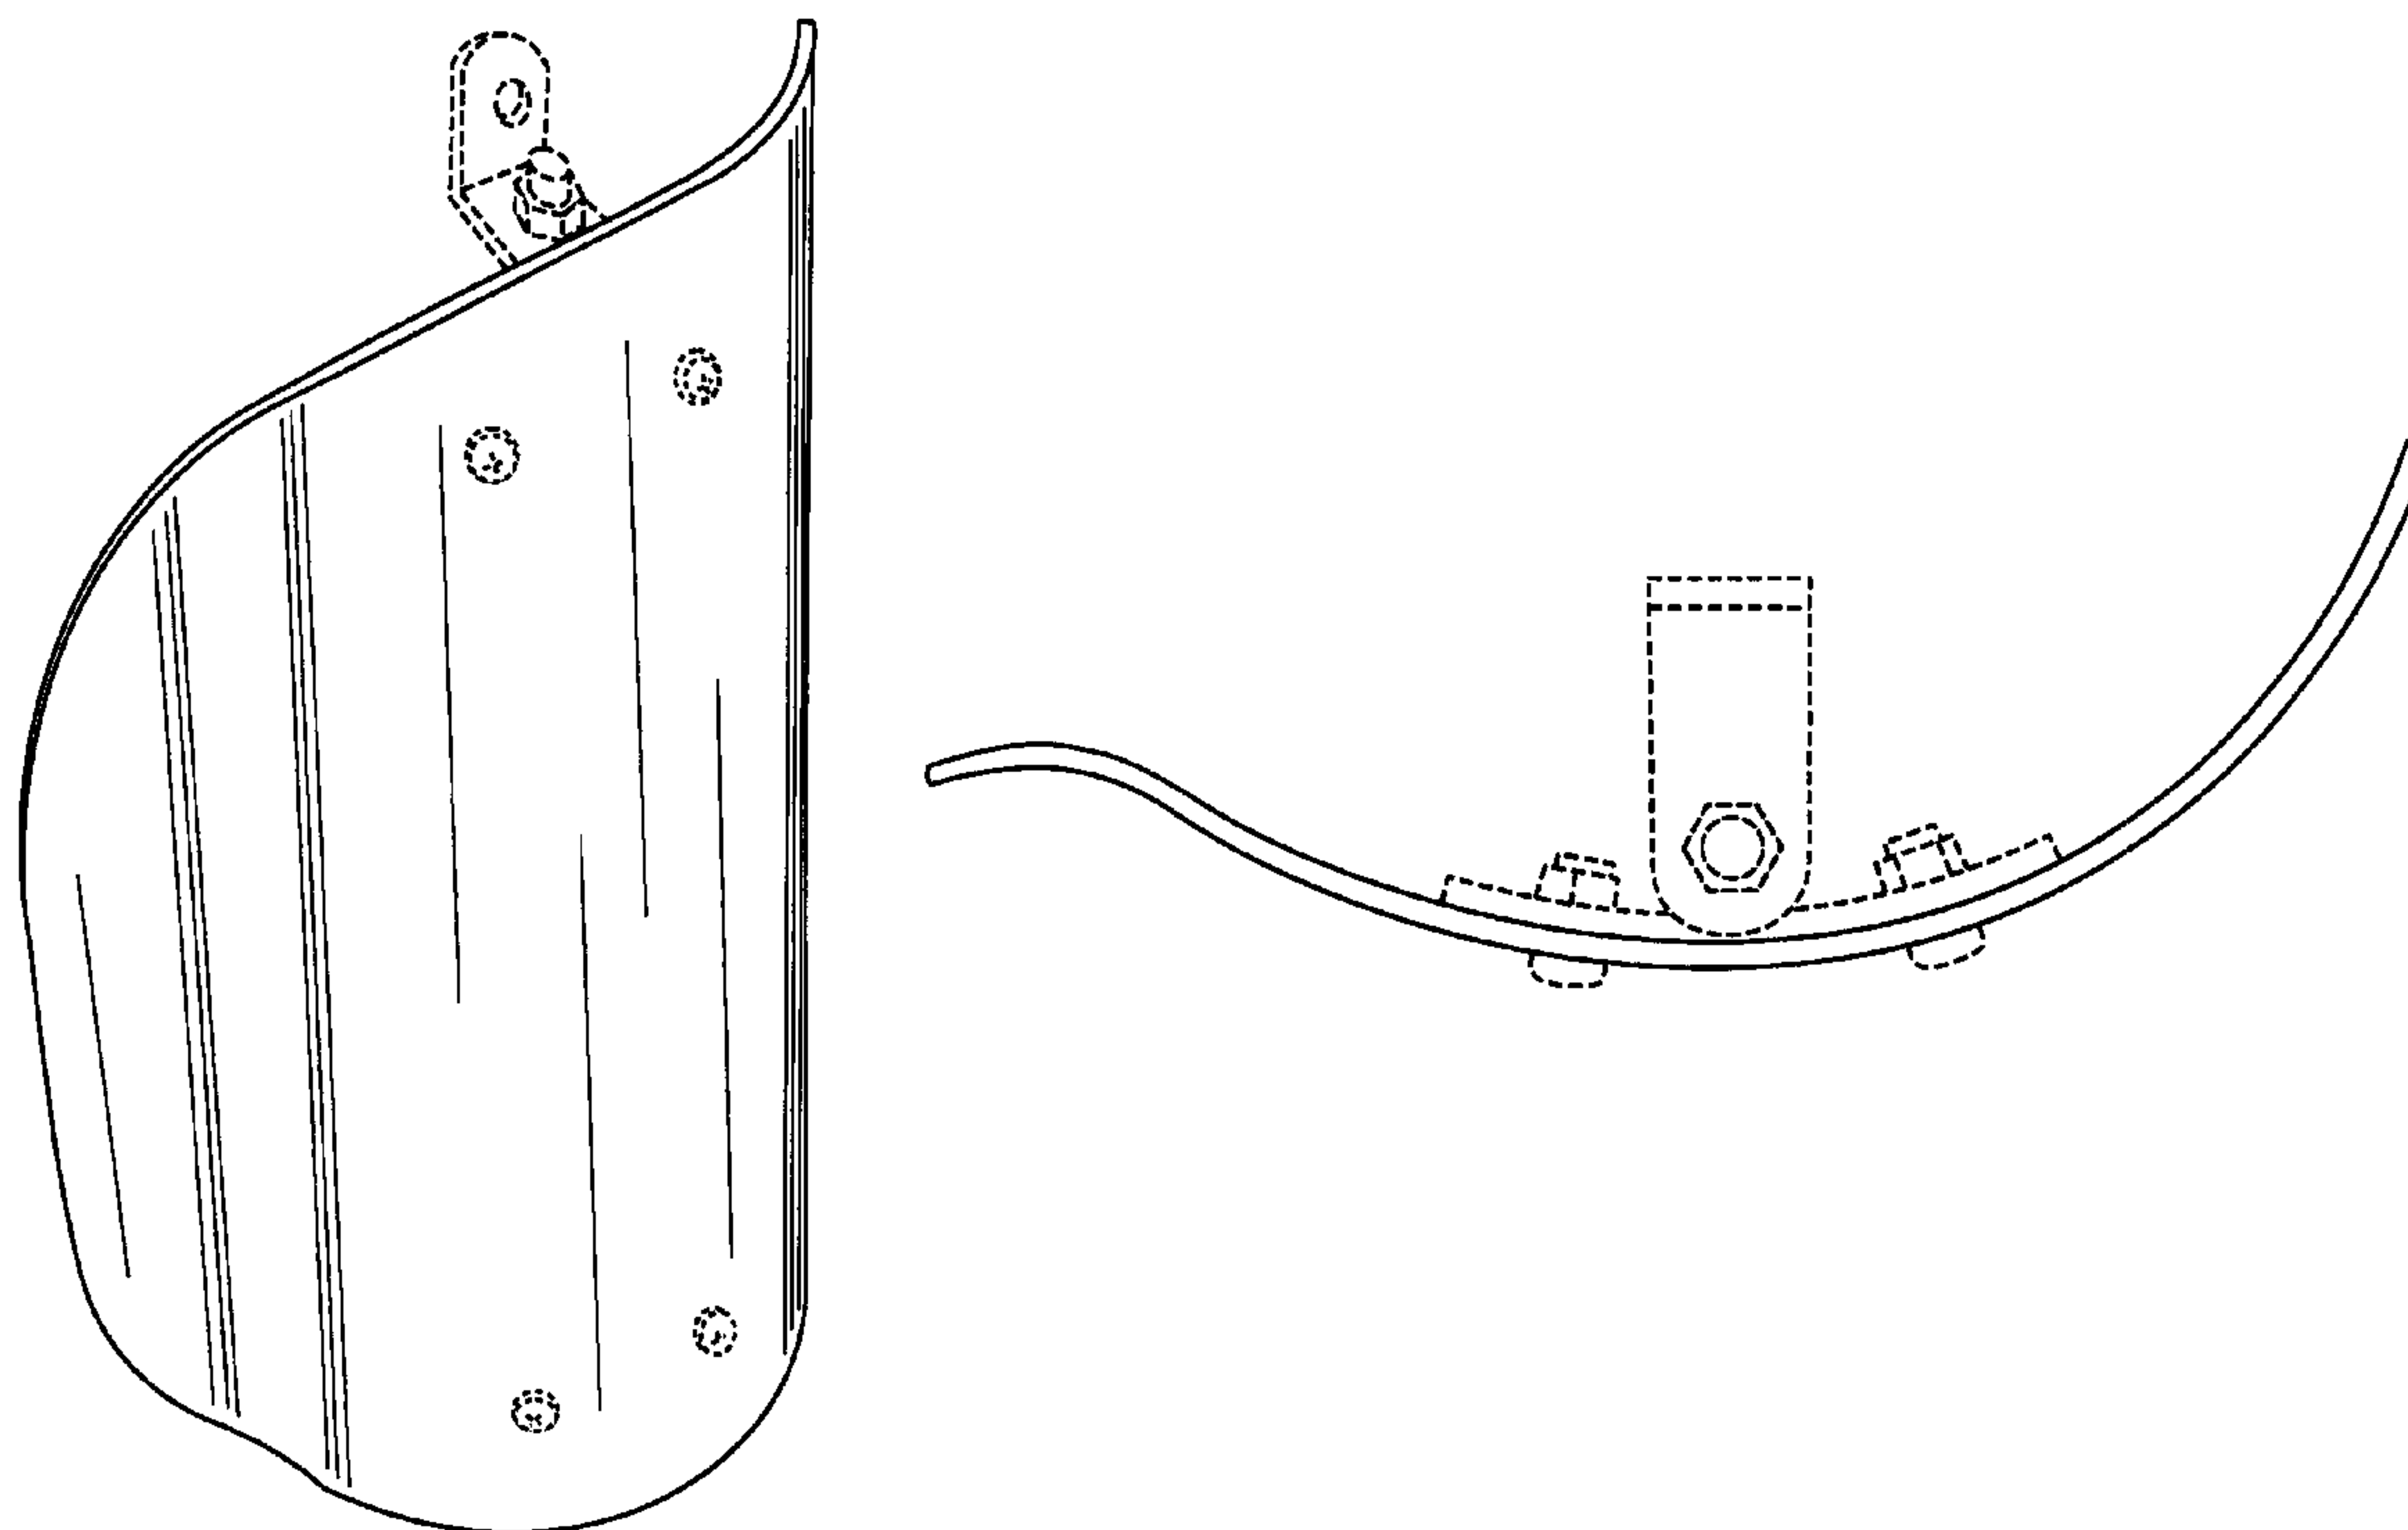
is a top view of the lower shield for a motorcycle with a mounting bracket shown in broken lines for illustrative purposes only, the bottom being a mirror image;
